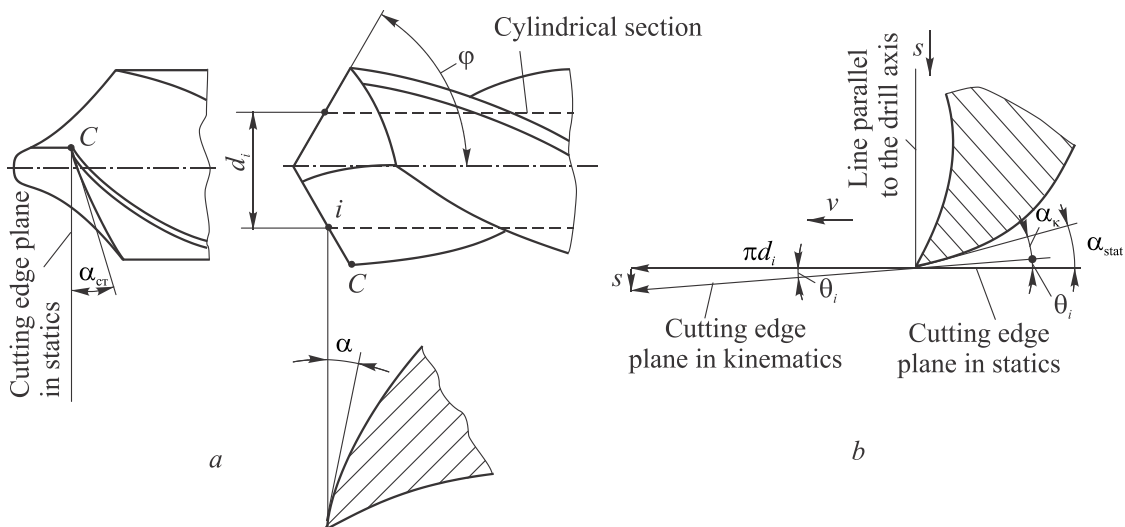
Clearance angles of a twist drill: (a) tool-in-hand; (b) working
